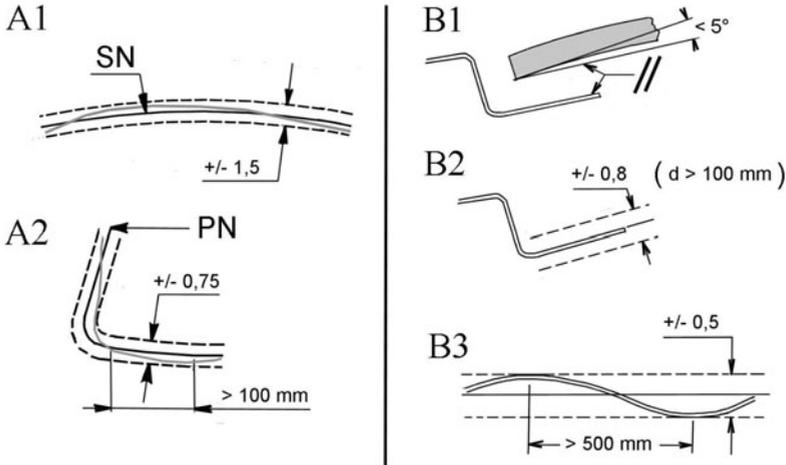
Windshield shape tolerances (A1, A2) and positioning tolerances of body windshield opening flange (B1, B2, B3). SN is design surface, PN design perimeter.
